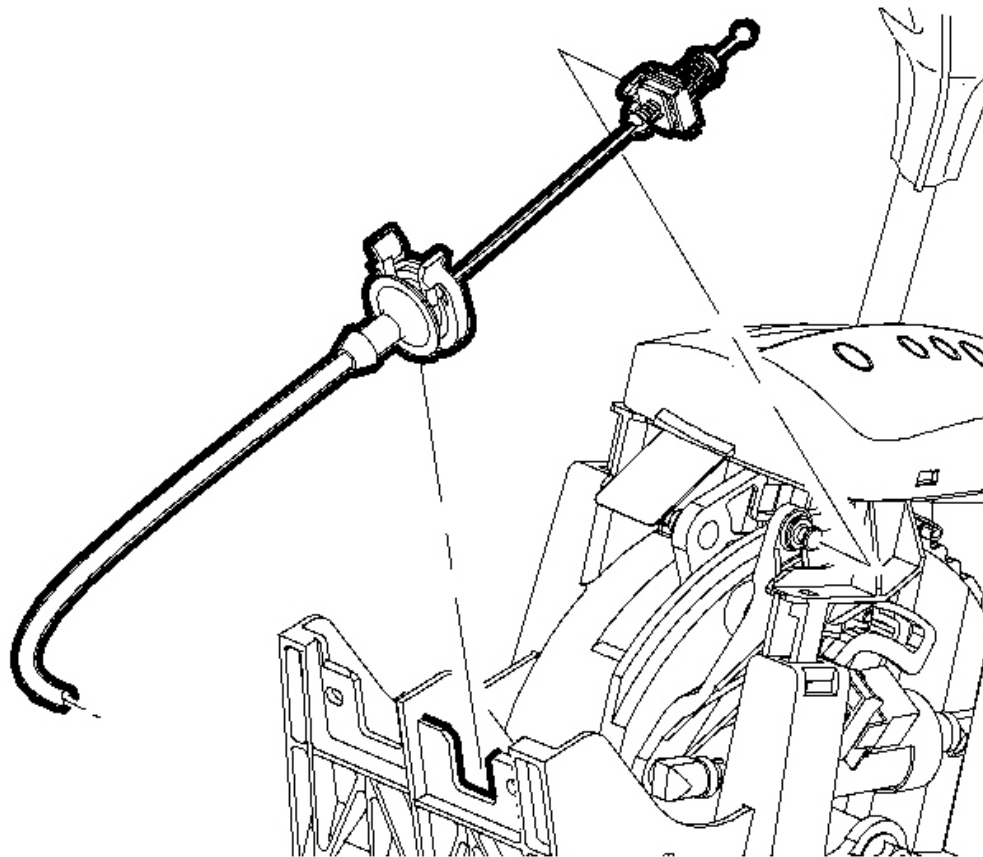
Park Lock Cable Assembly & Pin On Control Assembly
